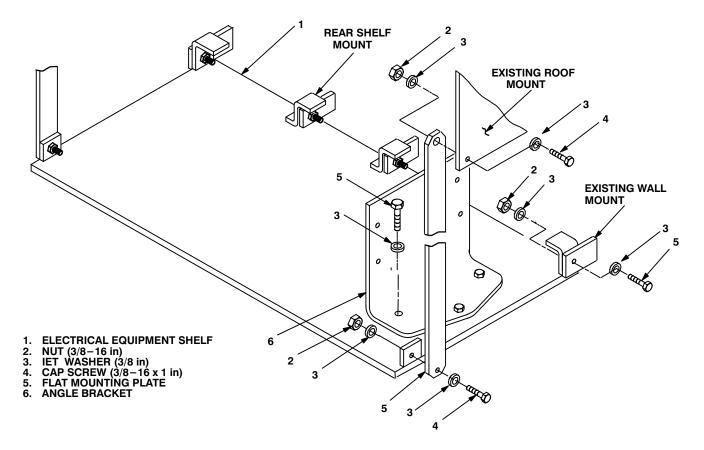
Electrical Equipment Shelf Assembly and Installation
